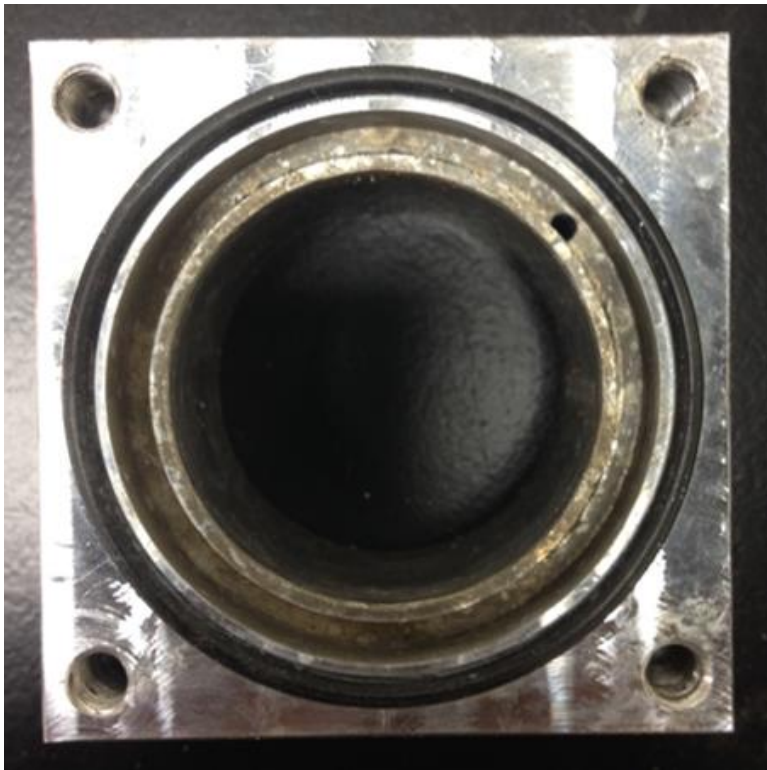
Top View of Bottom Piece of Cooling Device Showing O-ring, Water Groove, and Water Supply Hole
